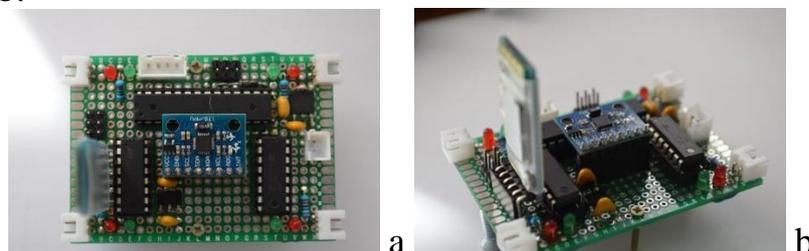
a) Top view of the robot balancer control board; 2b) General view of the robot balancer control board
